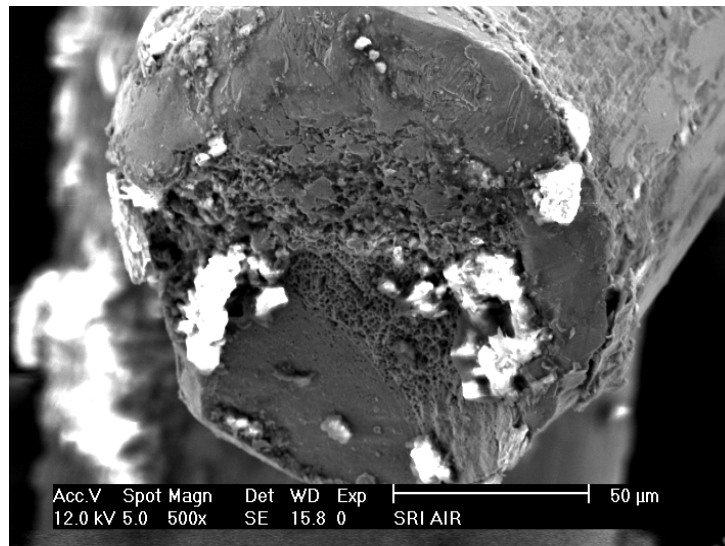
Fatigue fracture characteristic (no deformation and the 90° fracture). The initial fatigue crack is at the bottom part of the wire
